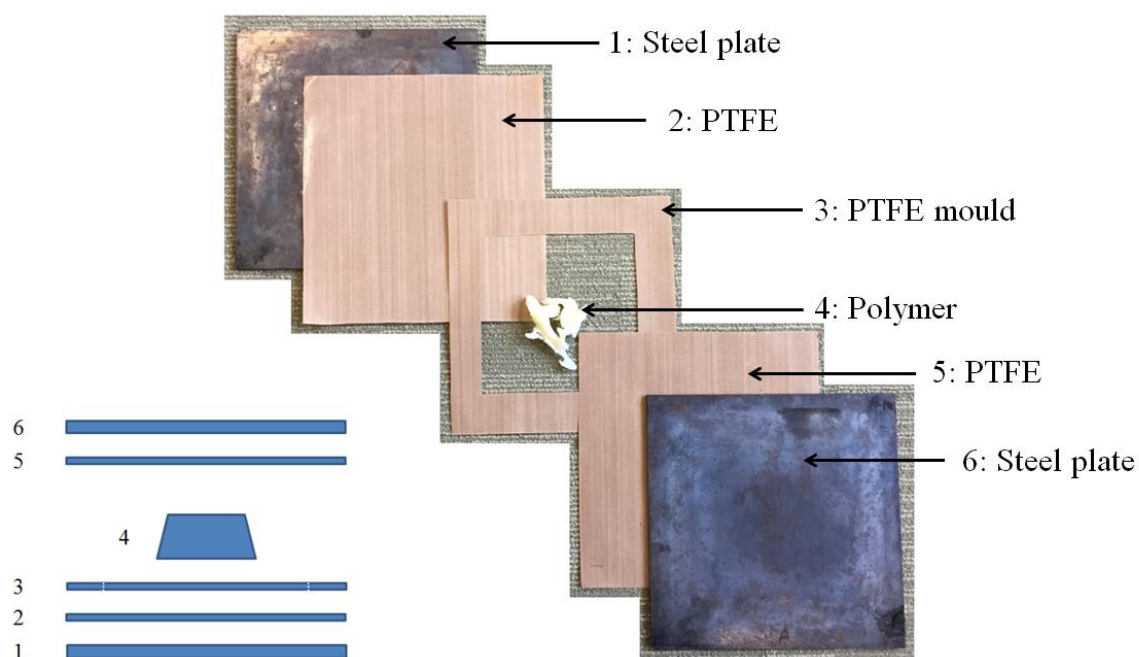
Example of layer assembly used to create flat polymer samples by hot pressing
